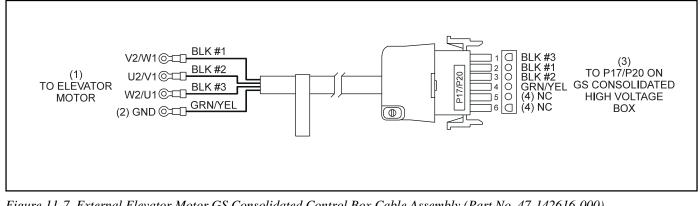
External Elevator Motor GS Consolidated Control Box Cable Assembly (Part No. 47-142616-000)
